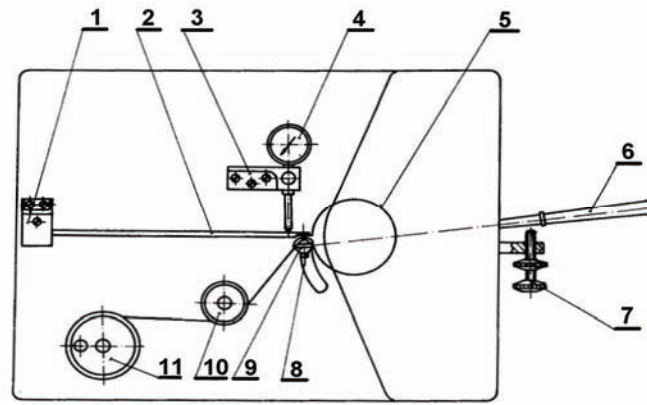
Schematic of device purposed for ring tangential force measurement: 1 – beam hold, 2 – elastic beam, 3 – sensor hold, 4 – micrometer, 5 – steel band, 6 – lever handle, 7 – limit screw, 8 – screw, 9 – band hold, 10 – rotating drum, 11 – tightening drum [1]
